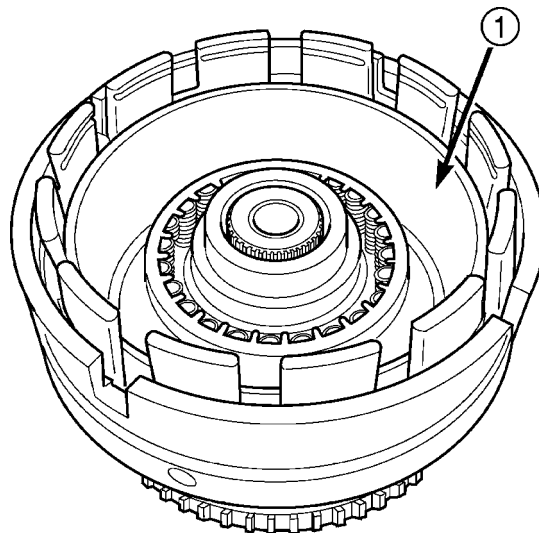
Install Underdrive Piston Using Tool 8504
